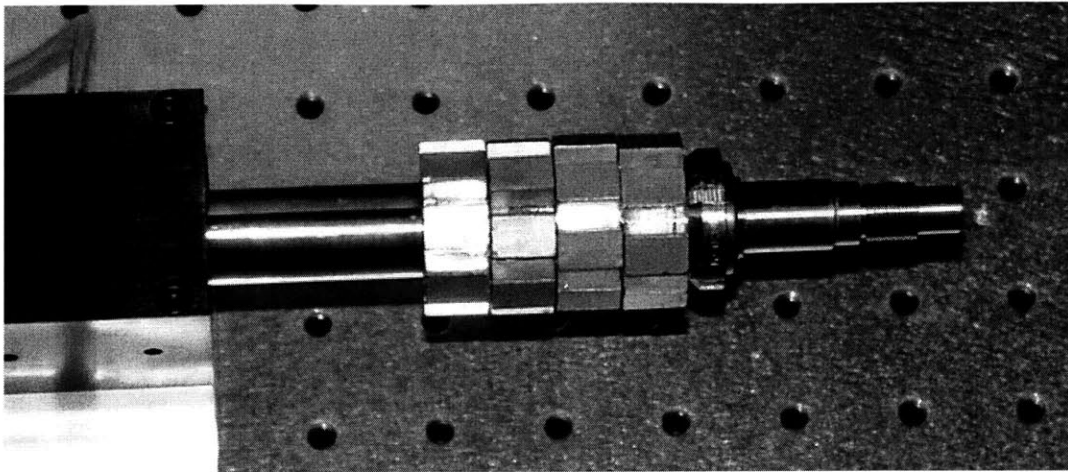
Linear motor permanent magnet rotor. The four magnet rings are axially clamped by the locknut.
